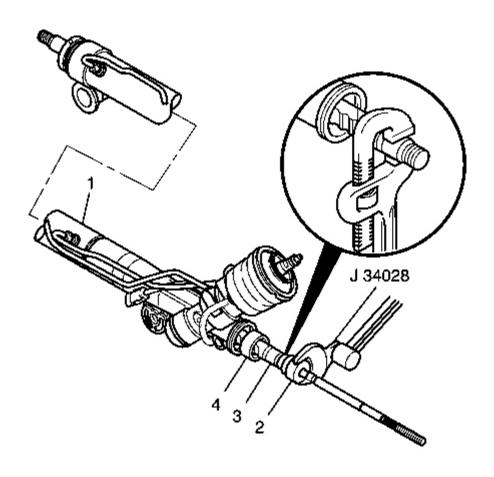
View of Shock Dampener, Rack, Female/Male Inner Tie Rod with J 34028 Courtesy of GENERAL MOTORS CORP.
